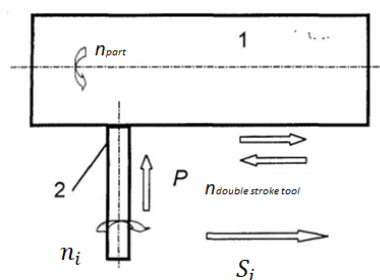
Scheme of friction-mechanical antifriction coating: 1-tool; 2-billet
